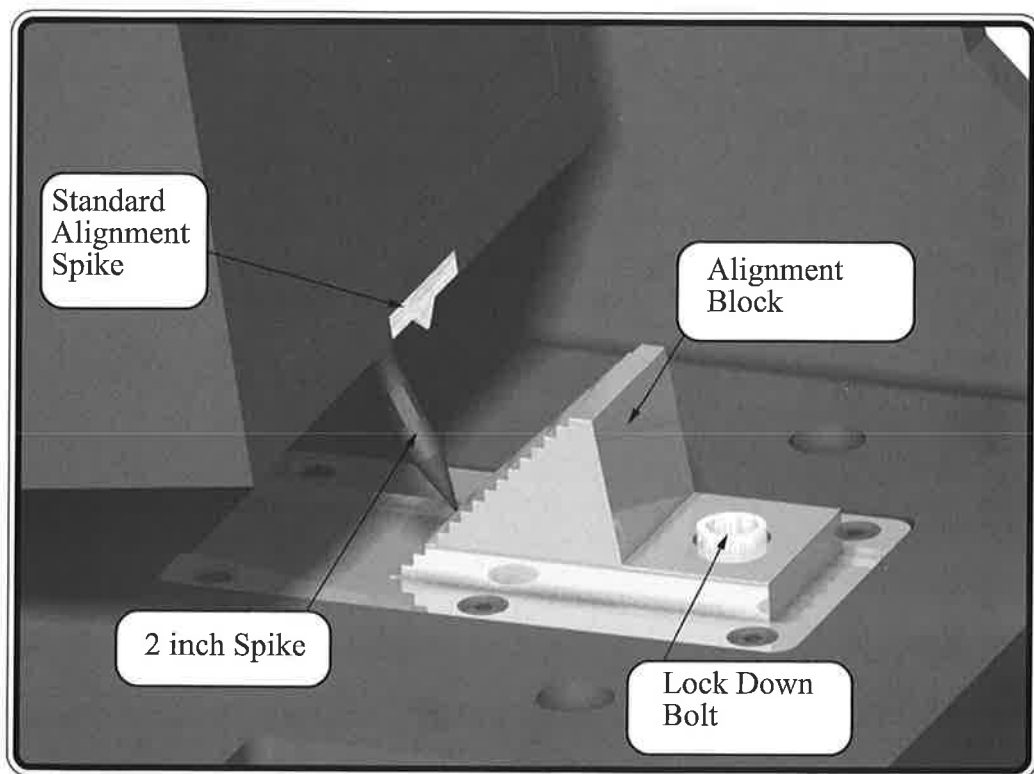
ALIGNMENT ASSEMBLY WITH 2 INCH SPIKE. USED FOR ALIGNMENT HEIGHTS S+1 THRU S+15.
